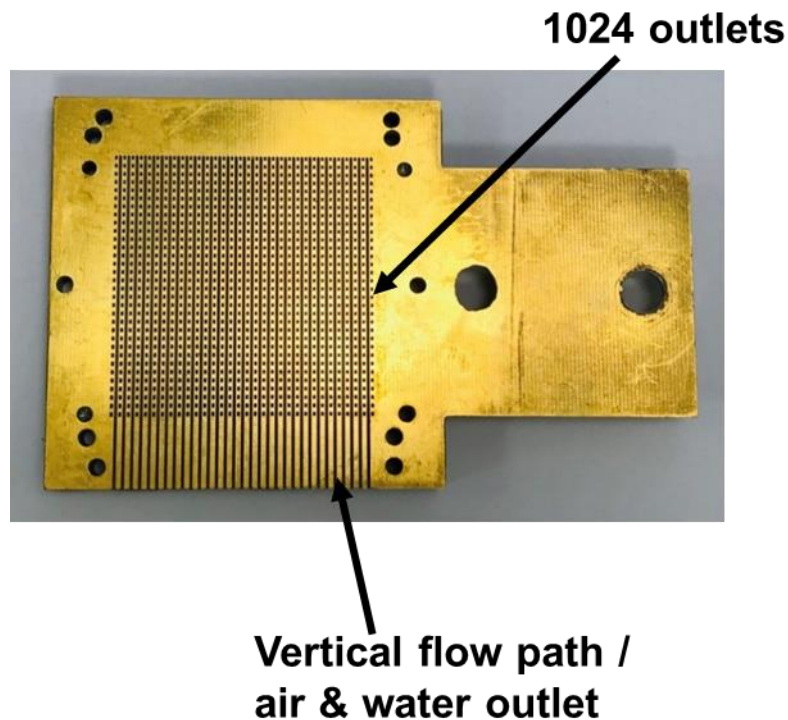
Final assembled cathode fractal flow-field with 25 cm² active MEA area – dimensions: 80 mm x 80 mm x 7.25 mm.
